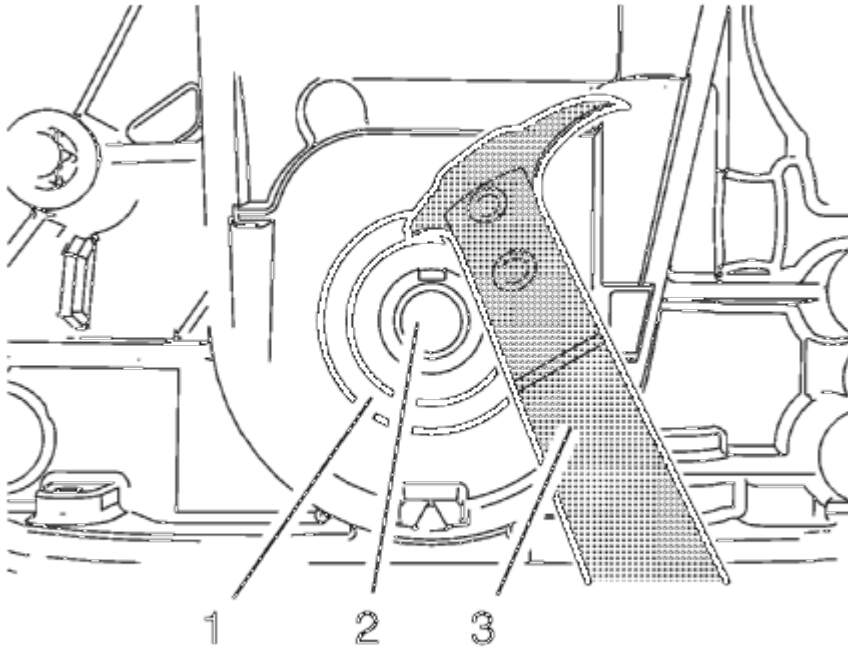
Crankshaft Front Oil Seal Removal Tool
